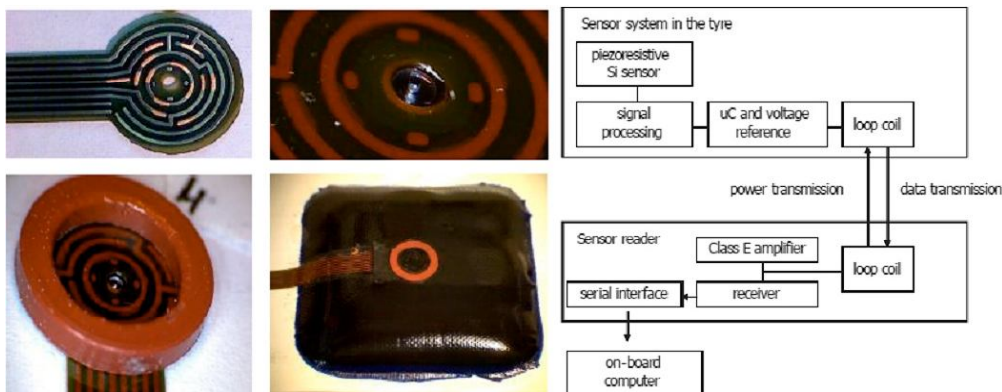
Sensor packaging step-by-step. a) flexible PCB b) Si chip mounted in the center of the PCB c) rubber spacers d) sensor in the rubber patch e) sensor in the rubber patch assembly ready for installation. Diagram of the system built-in the tyre (right).
